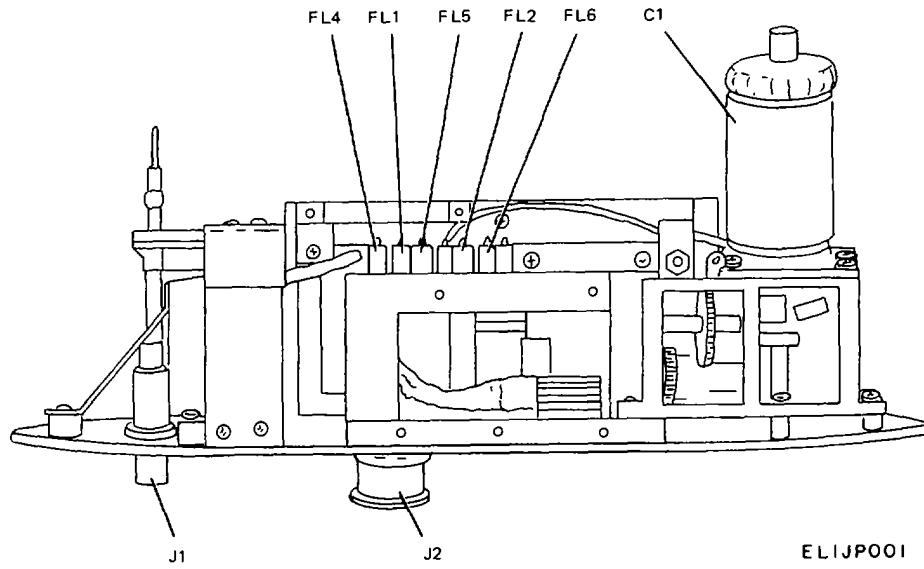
(1) 437S-1/1A/1C coupler assembly test points (sheet 1 of 2).
